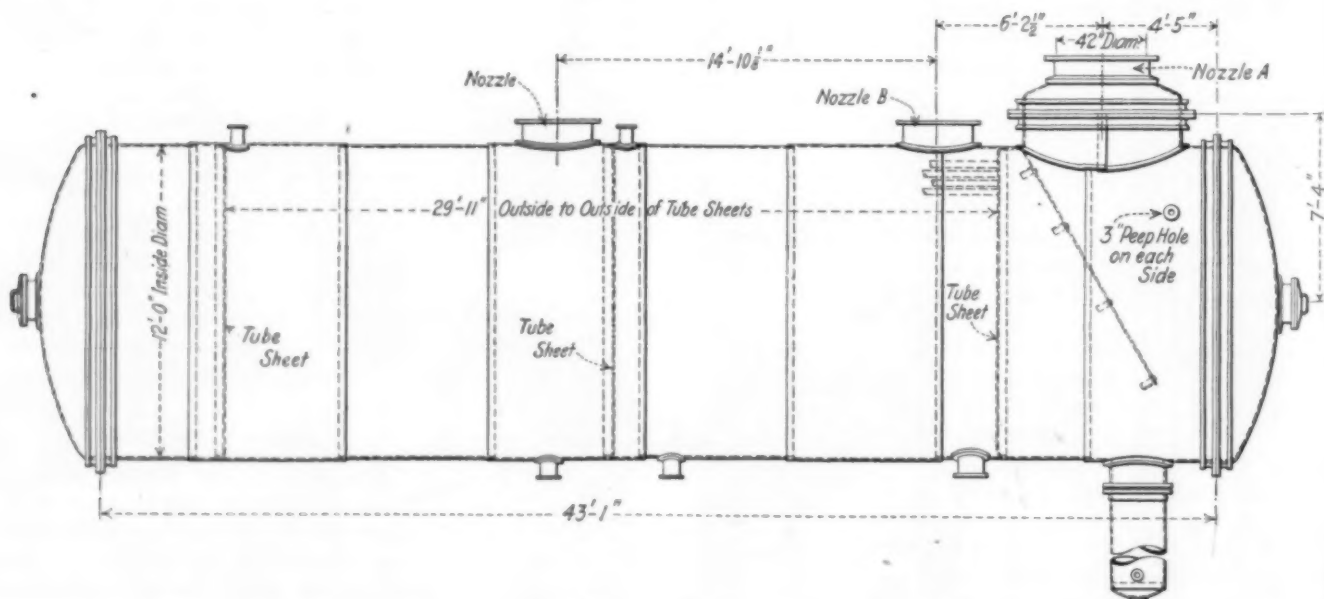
Working Drawing Showing General Type of Evaporator Designed
